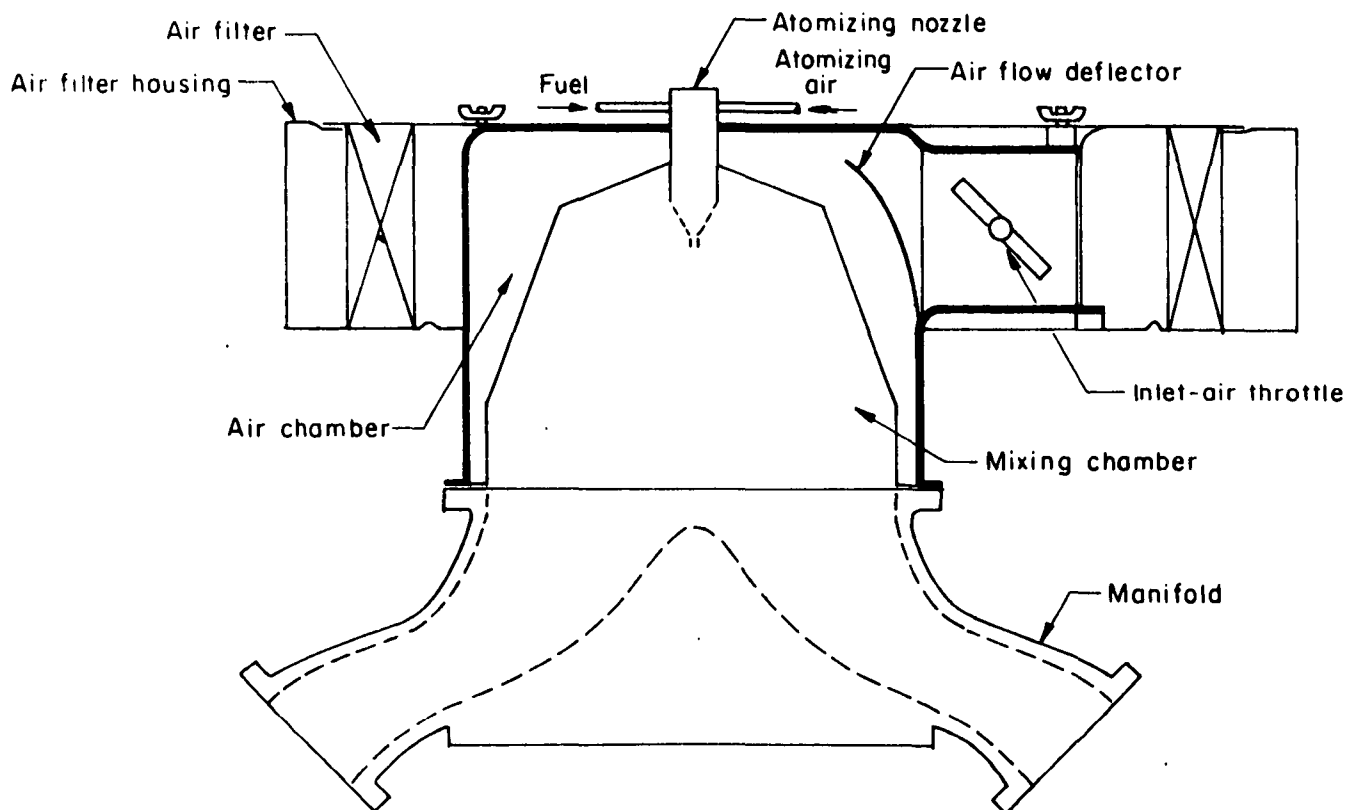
SKETCH LAYOUT OF PROPOSED INDUCTION SYSTEM WITH ALTERNATIVE INLET-AIR THROTTLE - SECTION VIEW
